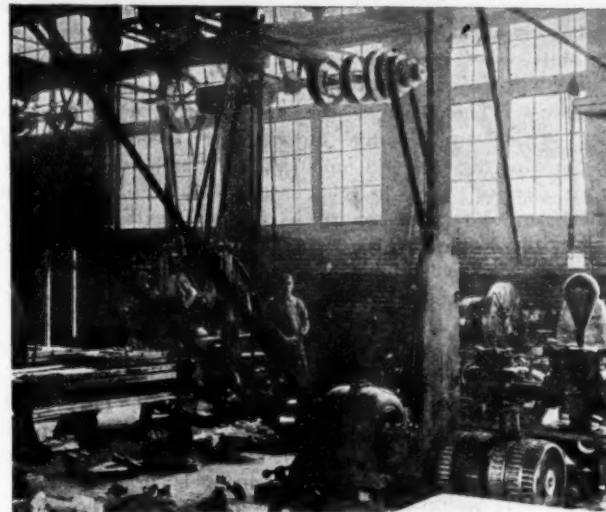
ONE CORNER OF THE MACHINE SHOP, SHOWING TWENTY HORSE POWER INDUCTION MOTOR.
